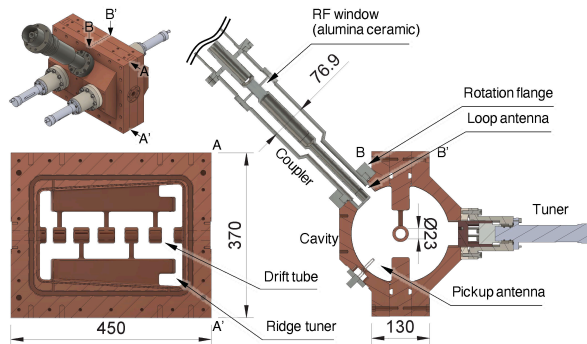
The sectional view of the mechanical design of the IH-DTL prototype and RF coupler.
